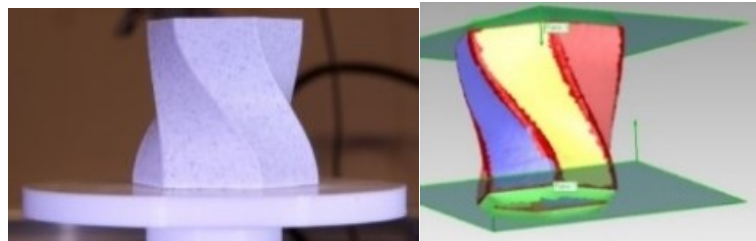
3D printed part reconstructed by Photogrammetry techniques
